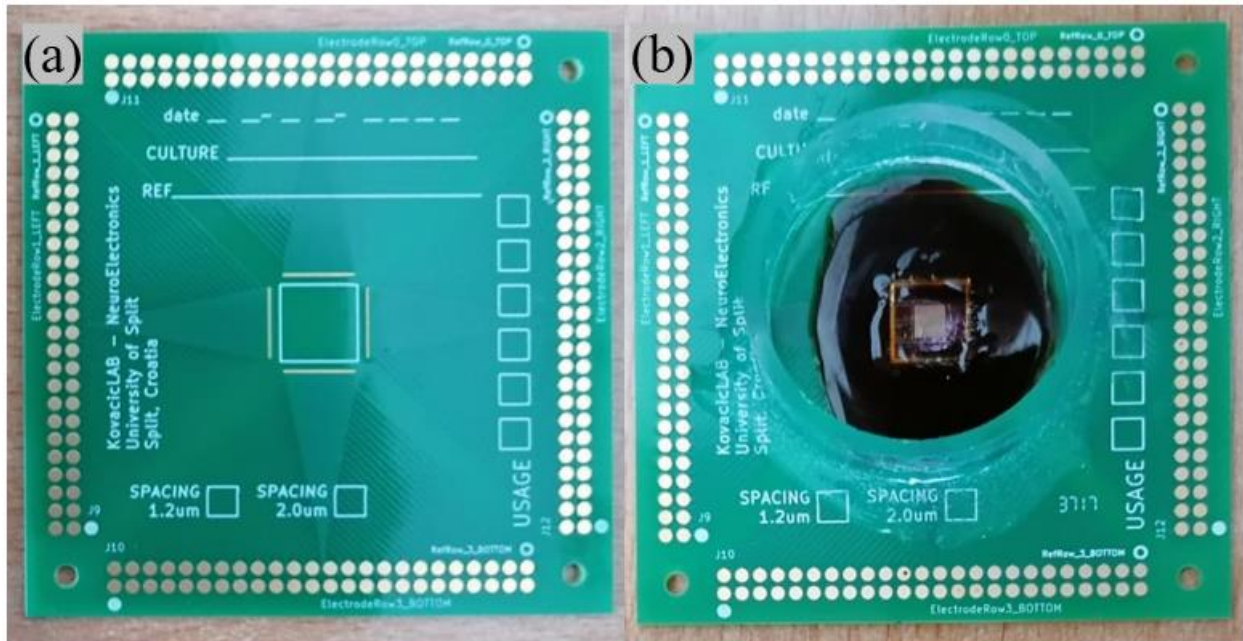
Chip carrier PCB before (a) and after (b) epoxy coating and attachment of the glass ring
